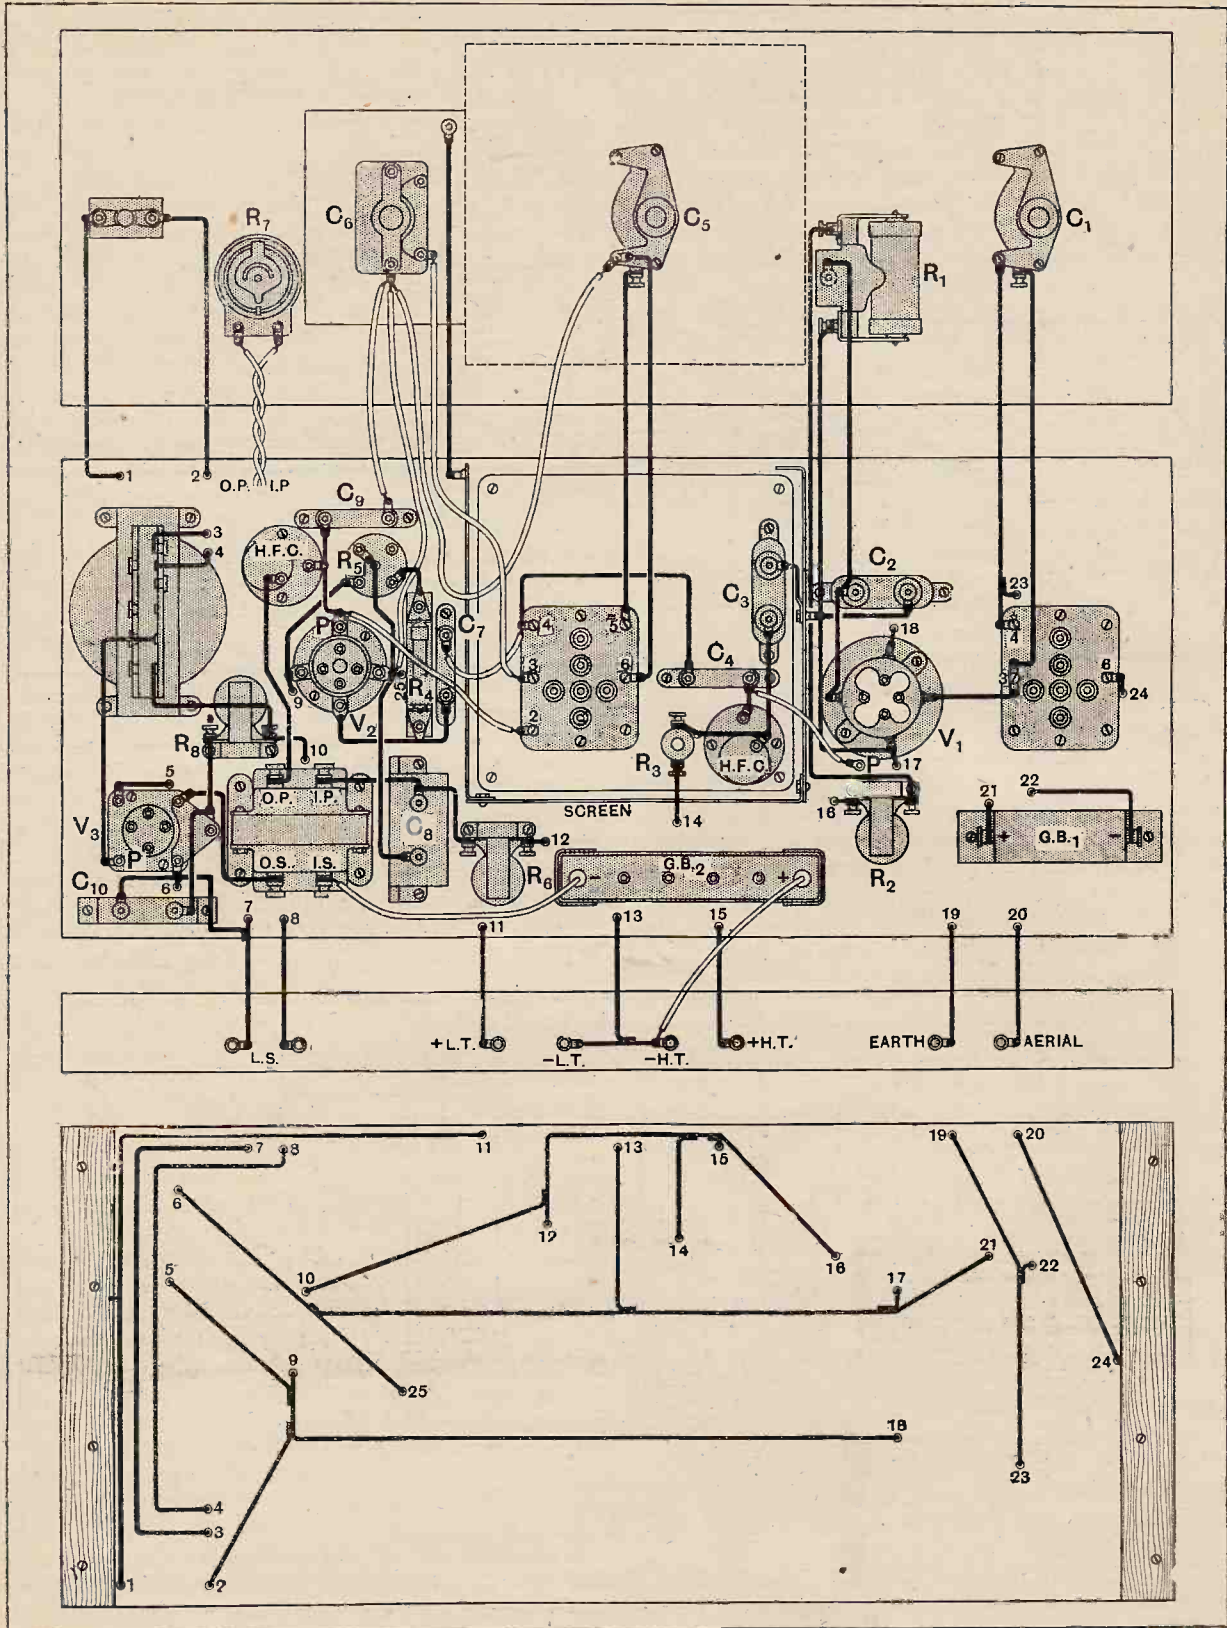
Practical wiring plan. Wires passing through the baseboard are lettered to facilitate tracing their path as shown on the under-deck plan.
